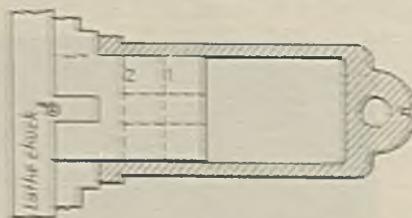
Method of holding jack cylinder true while drilling center in cylinder end
